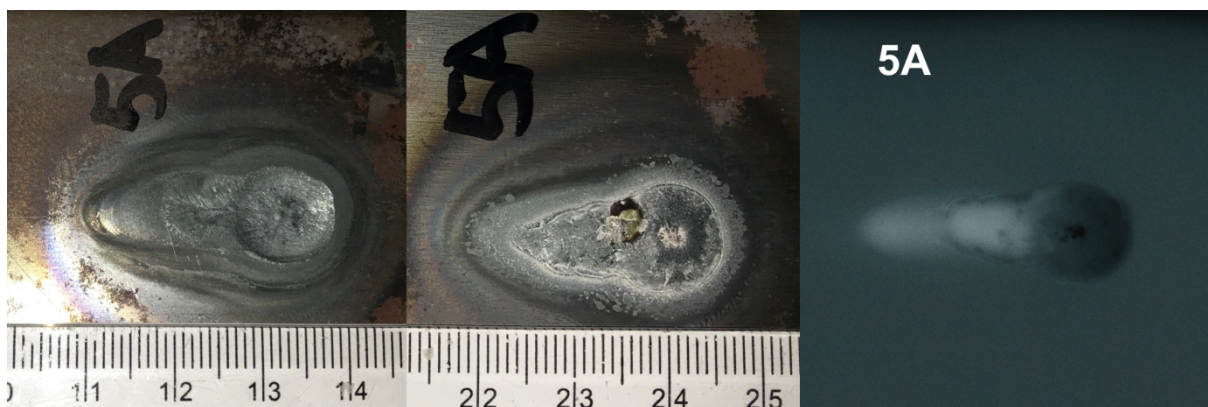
Photos of weld cap/ root of trial 5A and radiographic inspection result.
